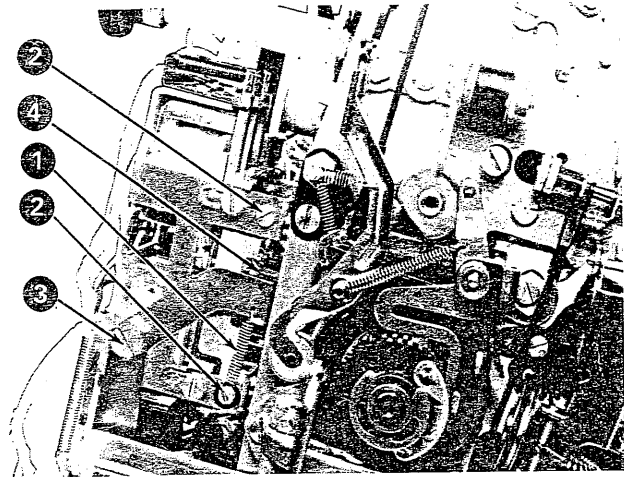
Operational-Magnet-Assembly Removal (Steps 1-5)
